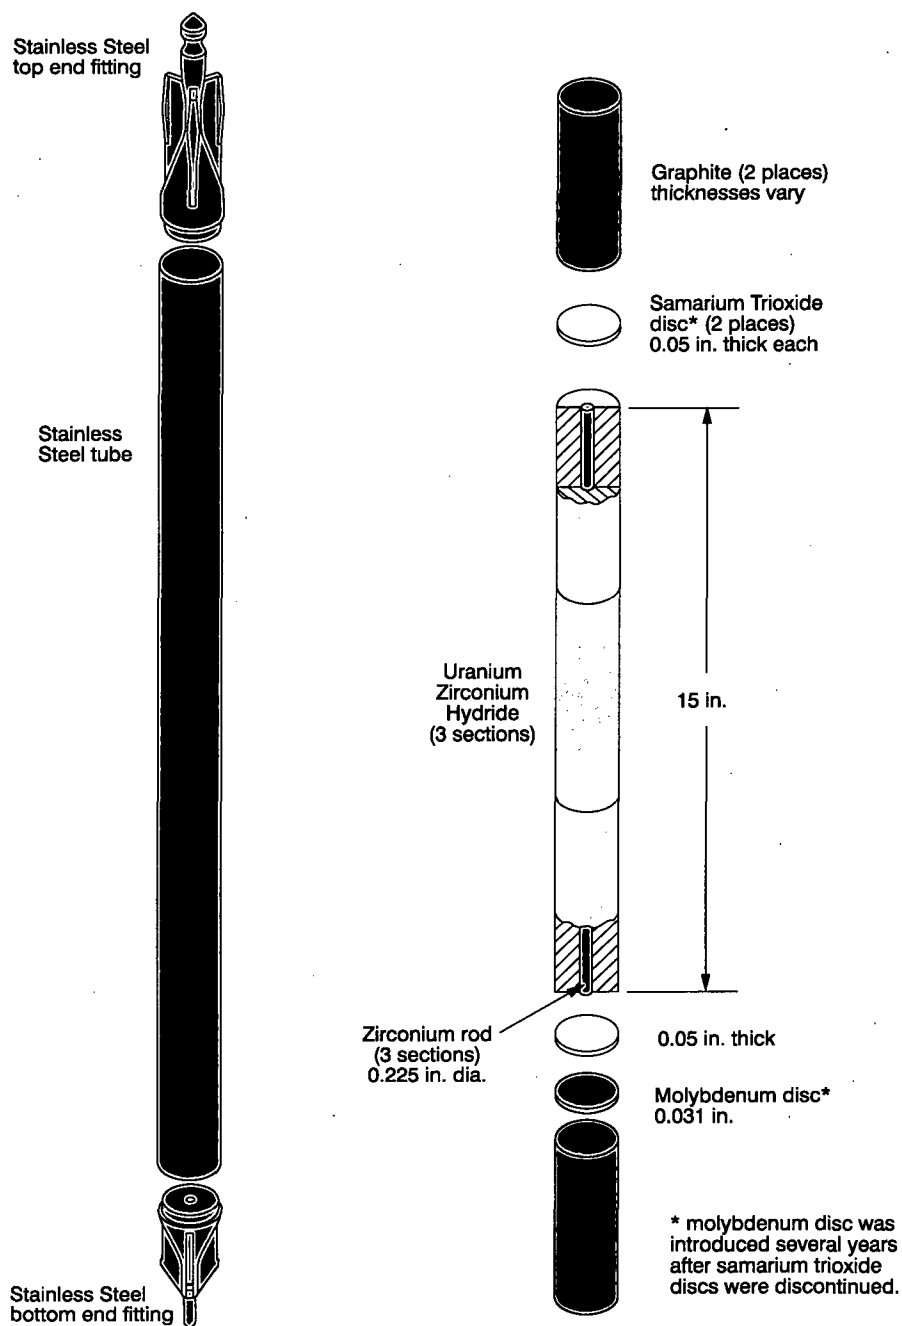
Typical Stainless Steel Clad TRIGA Fuel Element
